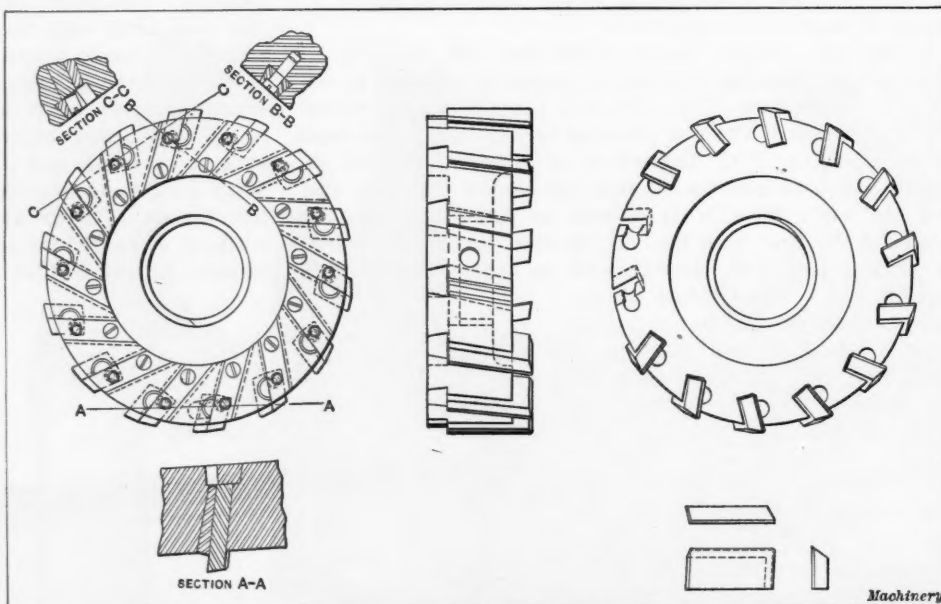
Assembly and Cross-sectional Views of Becker Inserted-tooth Milling Cutter showing Construction
